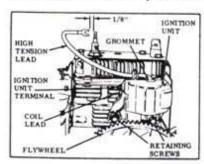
View of solid state ignition unit used on some models equipped with flywheel alternator. System should produce a good blue spark ½-inch (3 mm) long at cranking speed.
